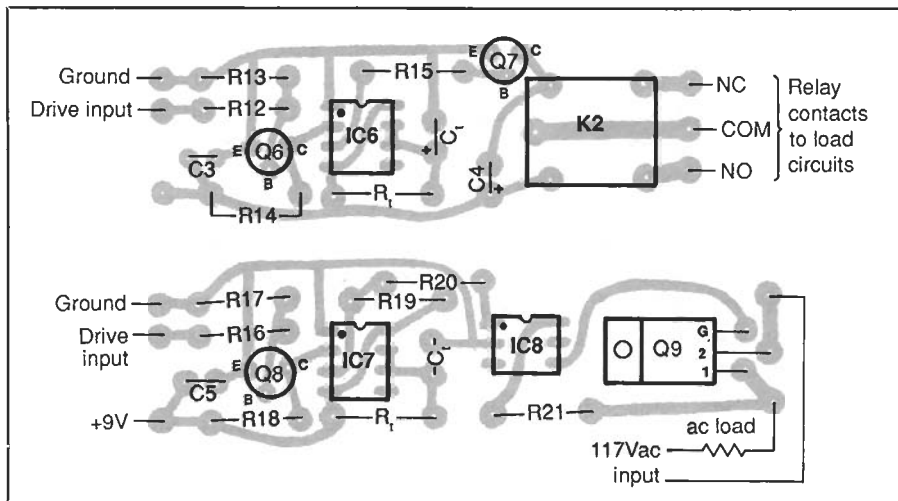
Pc wiring guides for Fig. 10 (upper) and Fig. 11 (lower) circuits.
